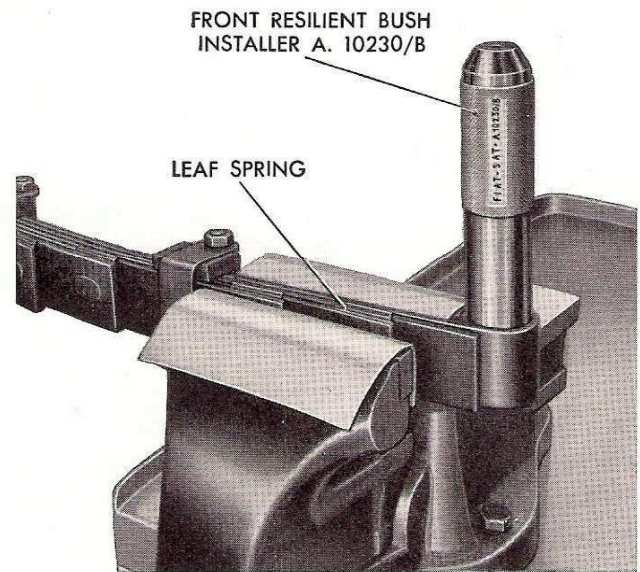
Installing the spring front end bushing, using installer A. 10230 (A. 74020).
